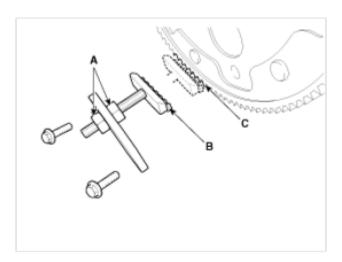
Identifying Holder Nuts, Holder And Ring Gear With Mounting Bolts
